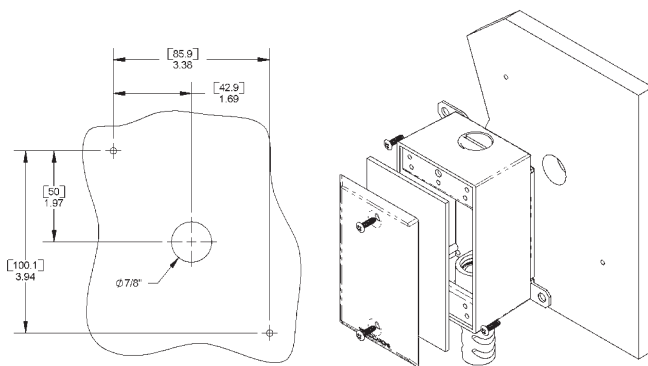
BAPI's WP enclosure and mounting hole dimensions.
